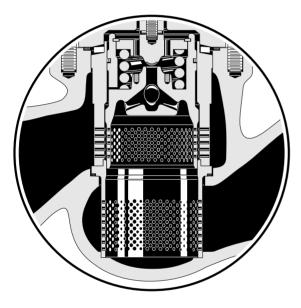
Valve equipped with a LO-DB cage and a plug having a multihole skirt for pressure expansion double stage and Diffuser (type 41•13-2B)
